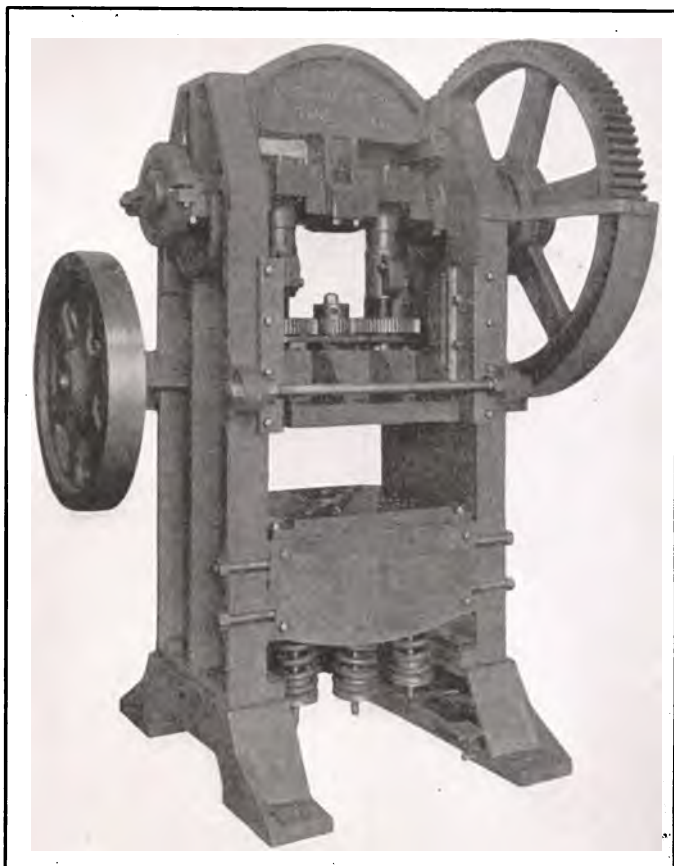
Press, showing spring plate attached under bed to operate pressure pins in dies
